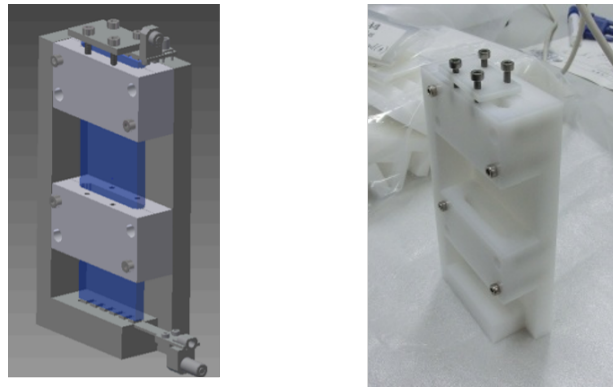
Schematic of assembly tool (Left) and its picture (right).
